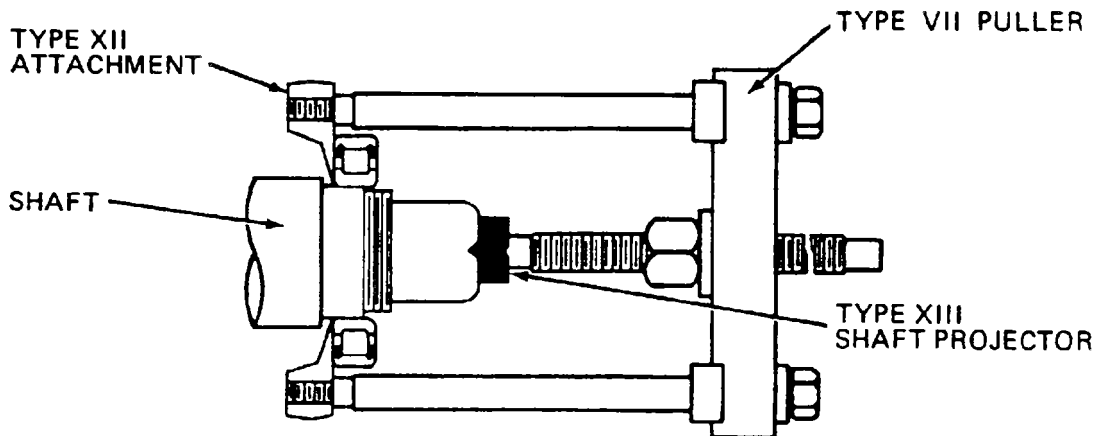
Bearing Puller Removal Using Split Puller Attachment and Shaft Protector
